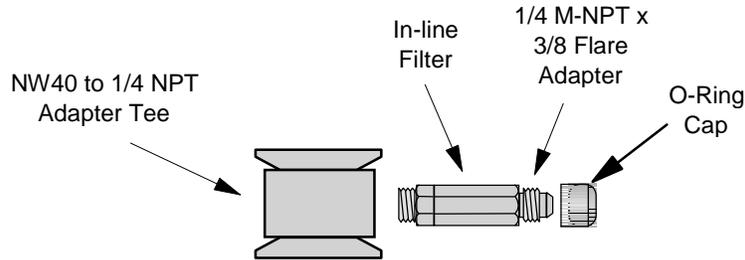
Beginning the Assembly of the High Vacuum Manifold
